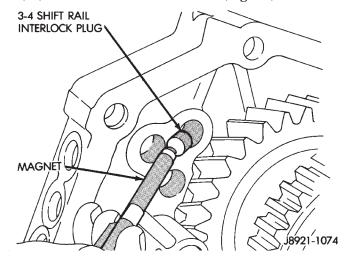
Remove 3-4 Shift Rail Interlock Plug
